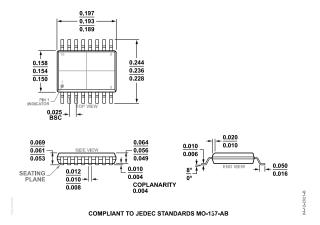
16-Lead Shrink Small Outline Package [QSOP] (RQ-16) Dimensions shown in inches
